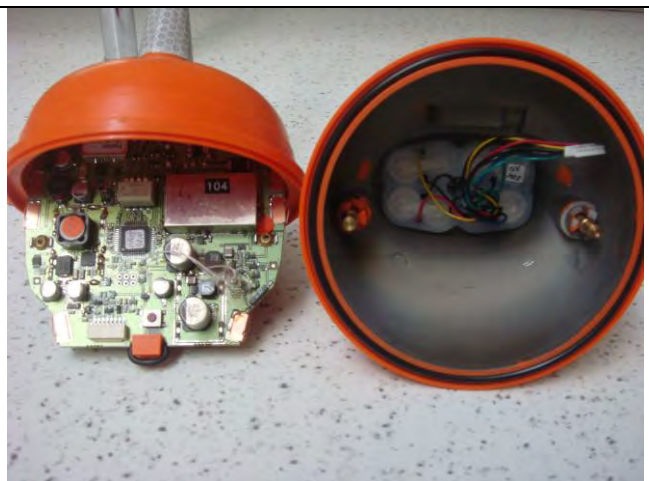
The PCB (back view) after immersion test. There is no water ingress.
